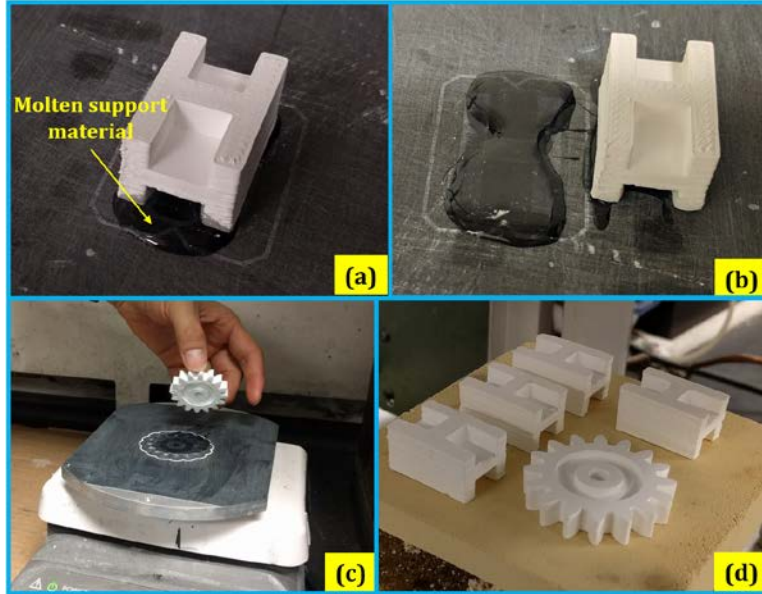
Support material removal and sintering: (a) Substrate heated to melt PLC, (b) & (c) Part separated from substrate, (d) Parts placed inside a furnace for sintering.
